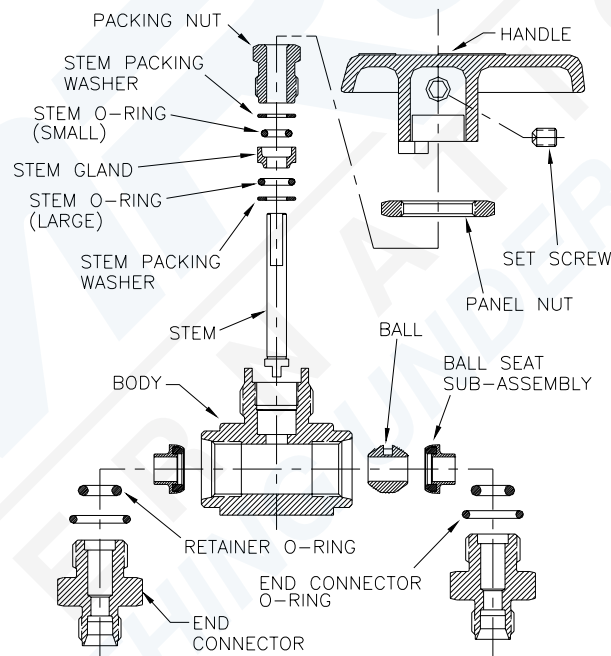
Ball Valve with O-Ring Stem Packing Assembly Exploded View
